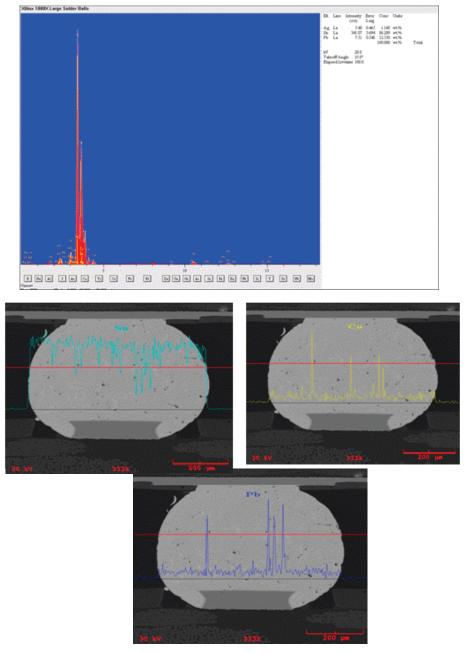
X-ray elemental analysis along the center line of FCBGA1704 for a solder ball at the package/board level.
